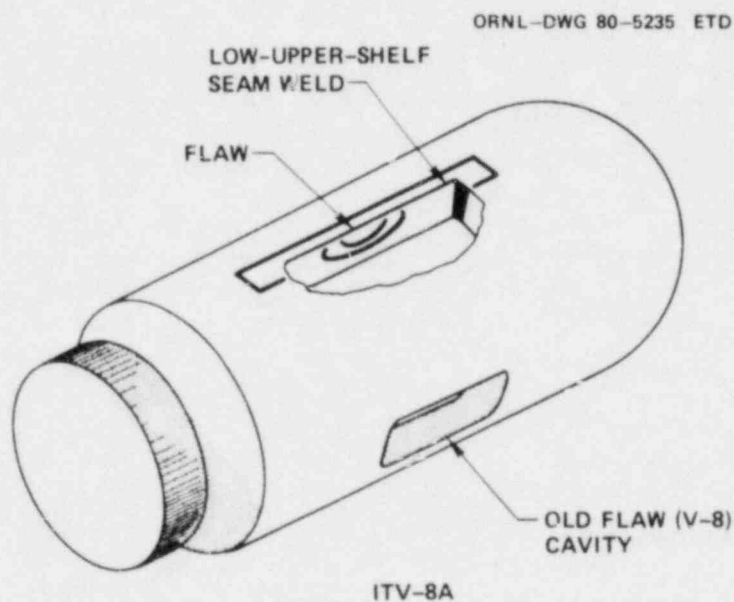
Schematic view of intermediate test vessel V-8A showing prepared flaw in special low-upper-shelf seam weld.
